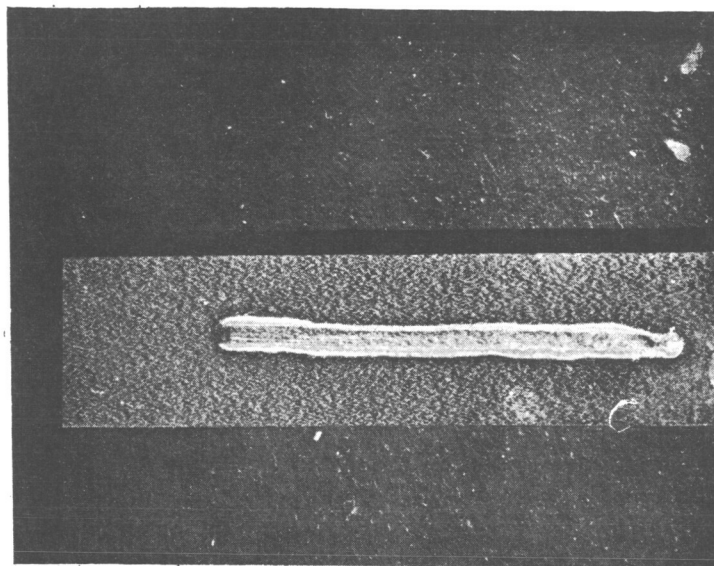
Photomacrograph of 6Al-4V Titanium seam weld. Weld schedule: 1.99 volts, 20 lbs. pressure, 30 inches/minute speed.
